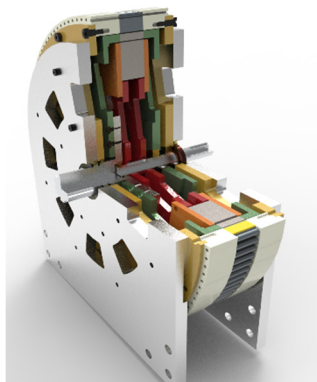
A 90-degree cut-away view of the stage 2 MG showing all the interior mechanical components [figure from Sina Modaresahmadi].
